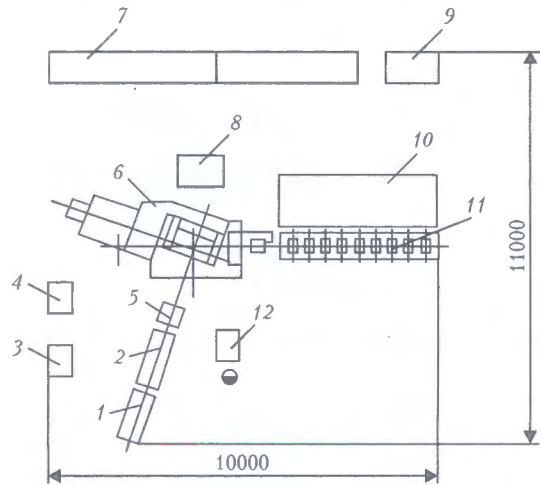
Diagram of production line for SWP: 1 - recoiling machine; 2 - feeding machine; 3 - control box for line; 4 - control box for plasma cutting; 5 - butt-welding machine; 6 - forming-welding machine; 7 - welding generator; 8 - welding head; 9 - heat exchanger; 10 - accumulating mechanism; 11 - receiving roll table with a cutting device; 12 - control panel
